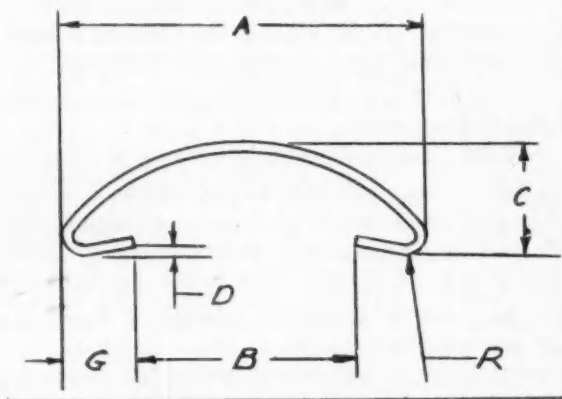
New SAE recommended practice for mouldings advises designers and draftsmen how to specify the above dimensions. For example, a tolerance of  $\pm 0.010$  is recommended for dimension A in the case of straight mouldings. Tolerances on same with bent mouldings is said to be inadvisable. And with snap-on type fasteners, minimum dimension C should be 5/32 in. with 0.020 or lighter metal specified for oval shapes. Dimension C should be held to 1/8 in. minimum with "flat top" shapes
